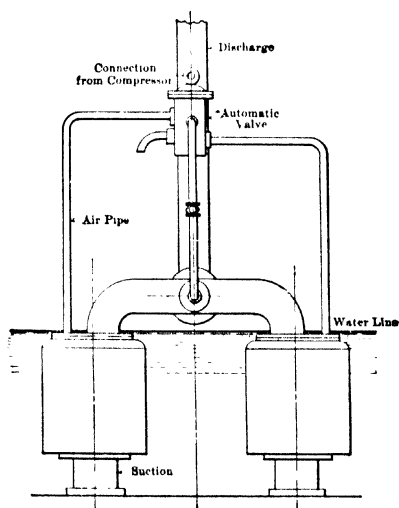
Merrill Pneumatic-Displacement Pump
